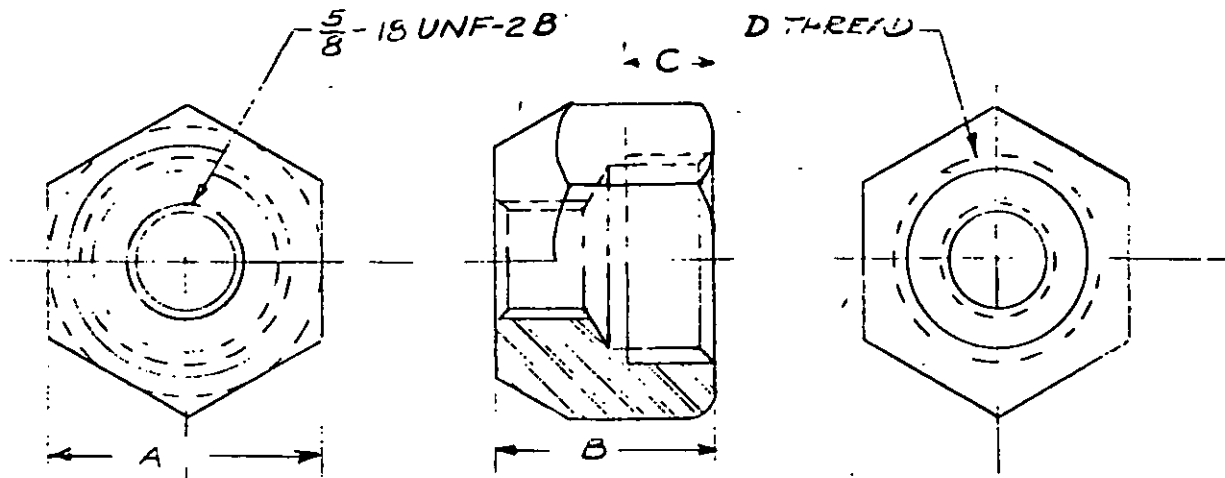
Type XIII, class 2, style A, puller adapter, mechanical, gear and bearing, female thread with 5/8-18 UNF-2B tapped hole.
